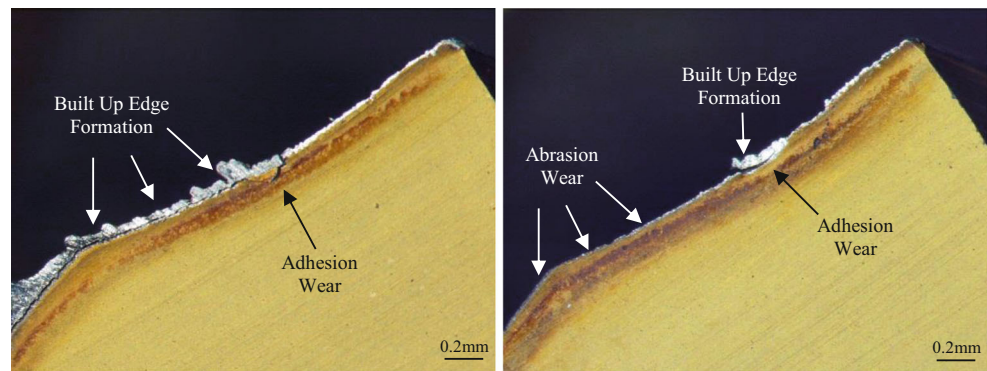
Built-up edge (BUE) formation on the flank face of a drill tool resulting to adhesion wear in cutting a SAF 2507 and b SAF 2205
